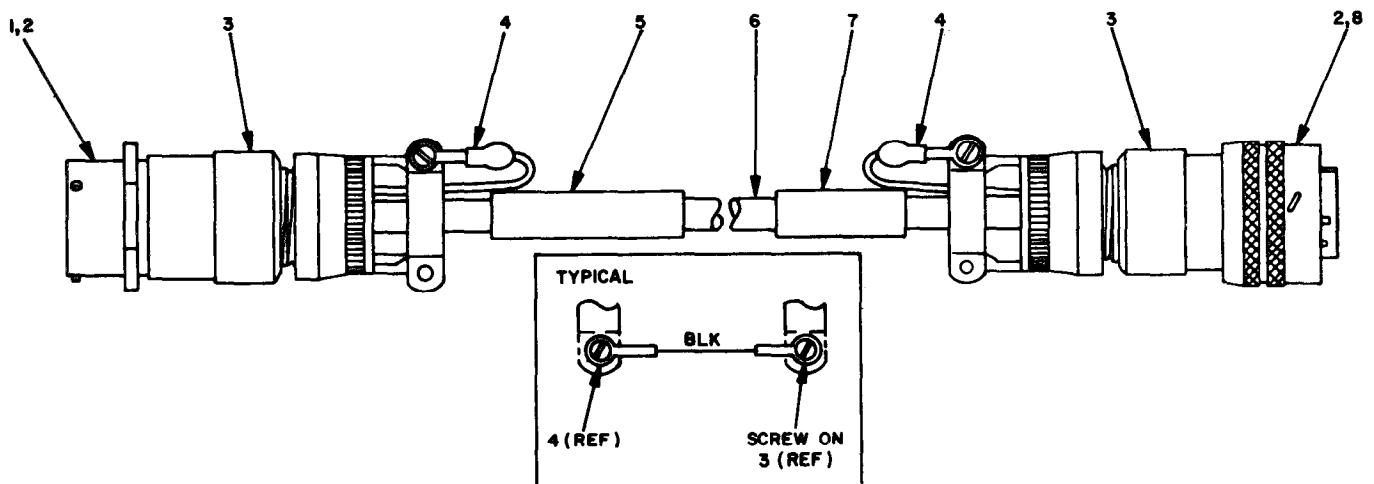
Adapter cable assembly, W6A (467-106-001) W6B (467-107-001) W7A (467-108-001) W7B (467-109-001) W8A (467-110-001) and W8B (467-111-001) (sheet 1 of 2)
